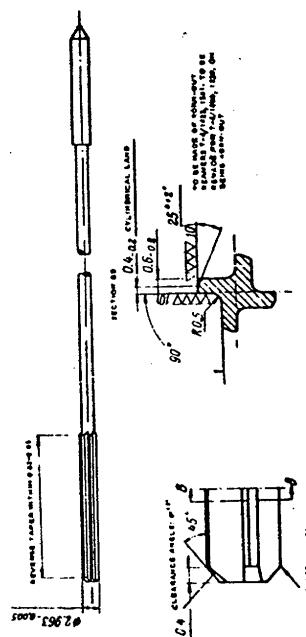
BLANK T-4/105 FOR RUSHING LOCK HOLE IN DOUBLE-REN TANING GEAR
